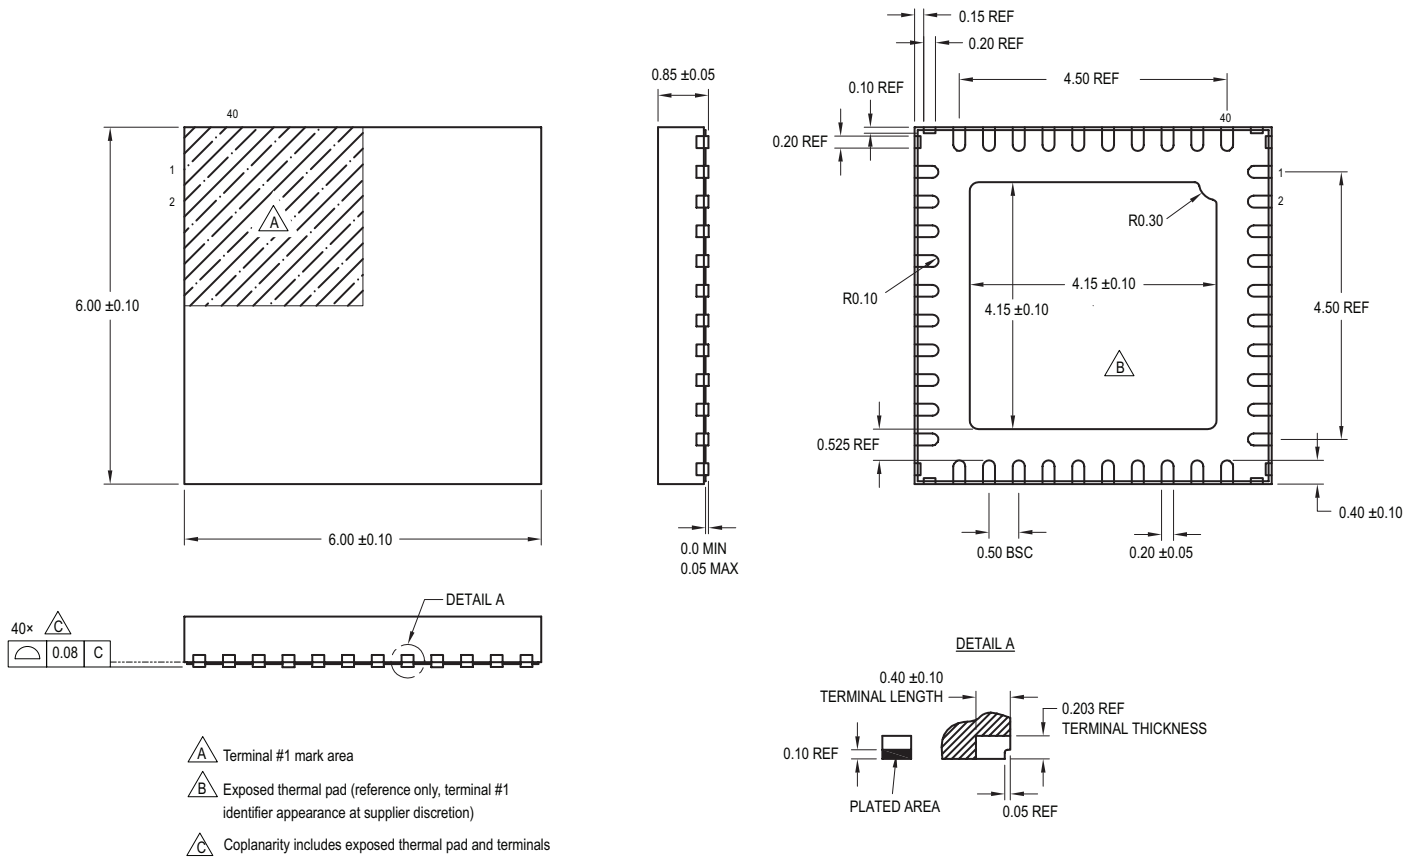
Package EV, Wettable Flank 40-Terminal eQFN with Exposed Pad
